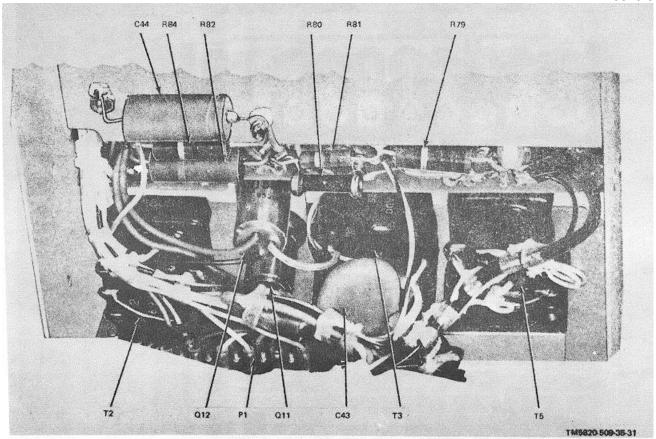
Audio Frequency Amplifier AM-3506/PRC-47(A8A1), Cover Removed, Chassis Subassembly. 3-18
